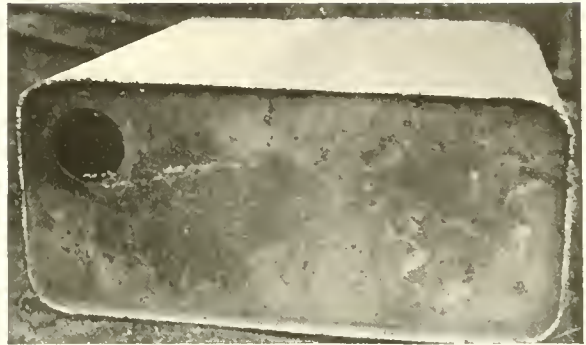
Storage tank made complete by electric arc welding. The flanged end is welded into the sides by melting its edges together with the edges of the side sheets.
